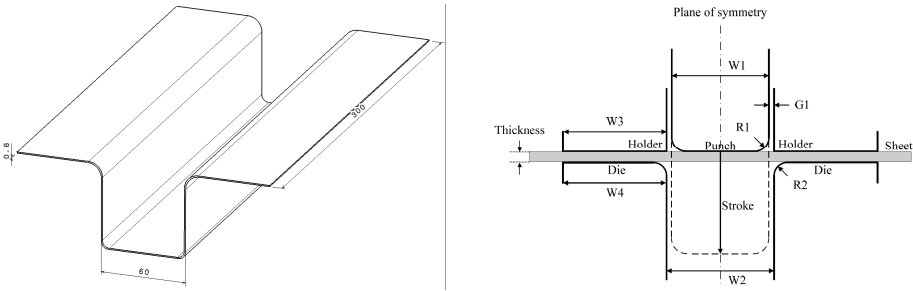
A schematic view of tools and dimensions for the open-channel part
